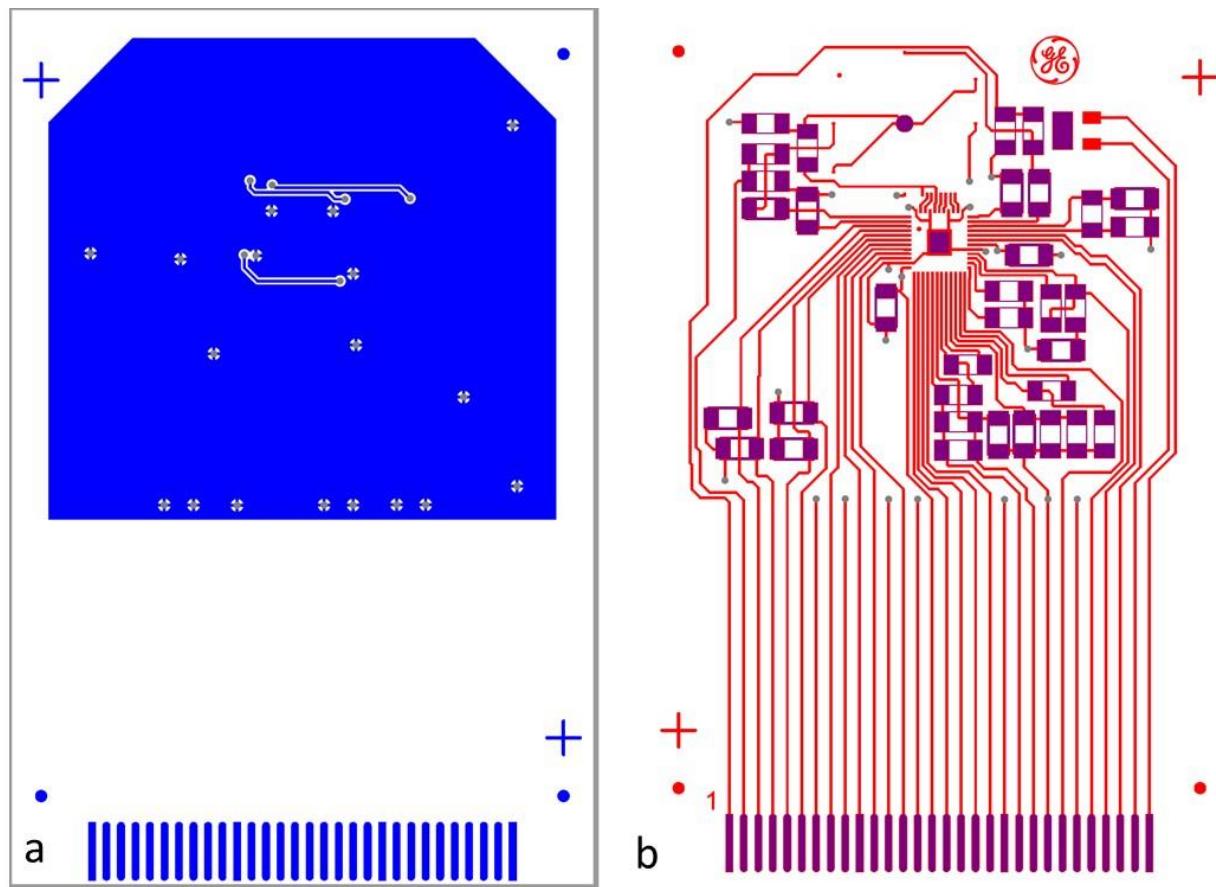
Ceramic board layout: (a) first interconnect layer layout. (b) second interconnect layer layout.
